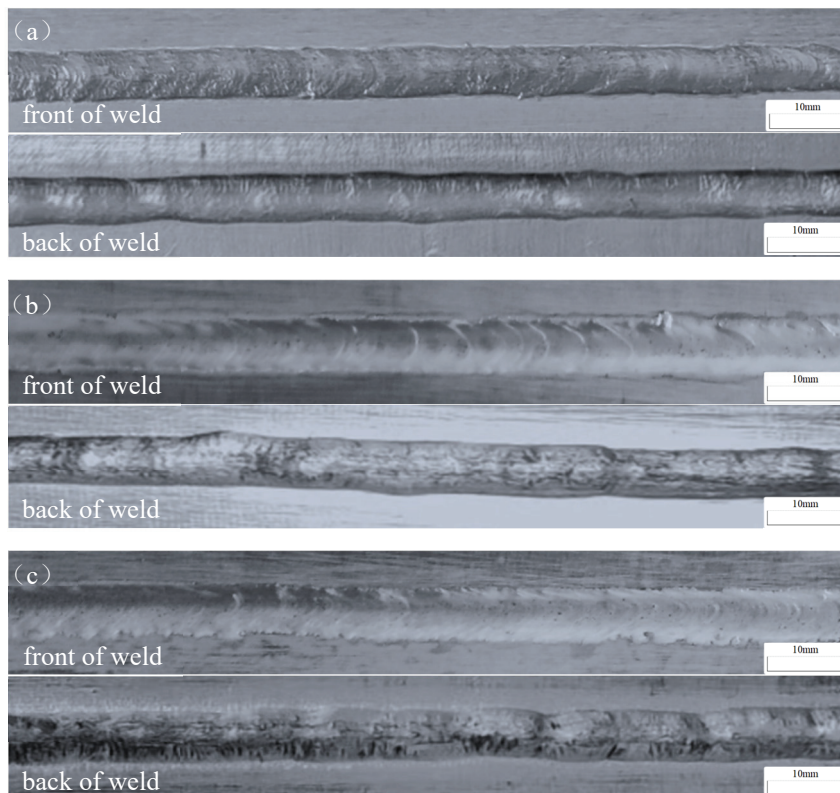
Surface morphology of welded joints: (a) Wire-1; (b) Wire-2; and (c) Wire-3.
